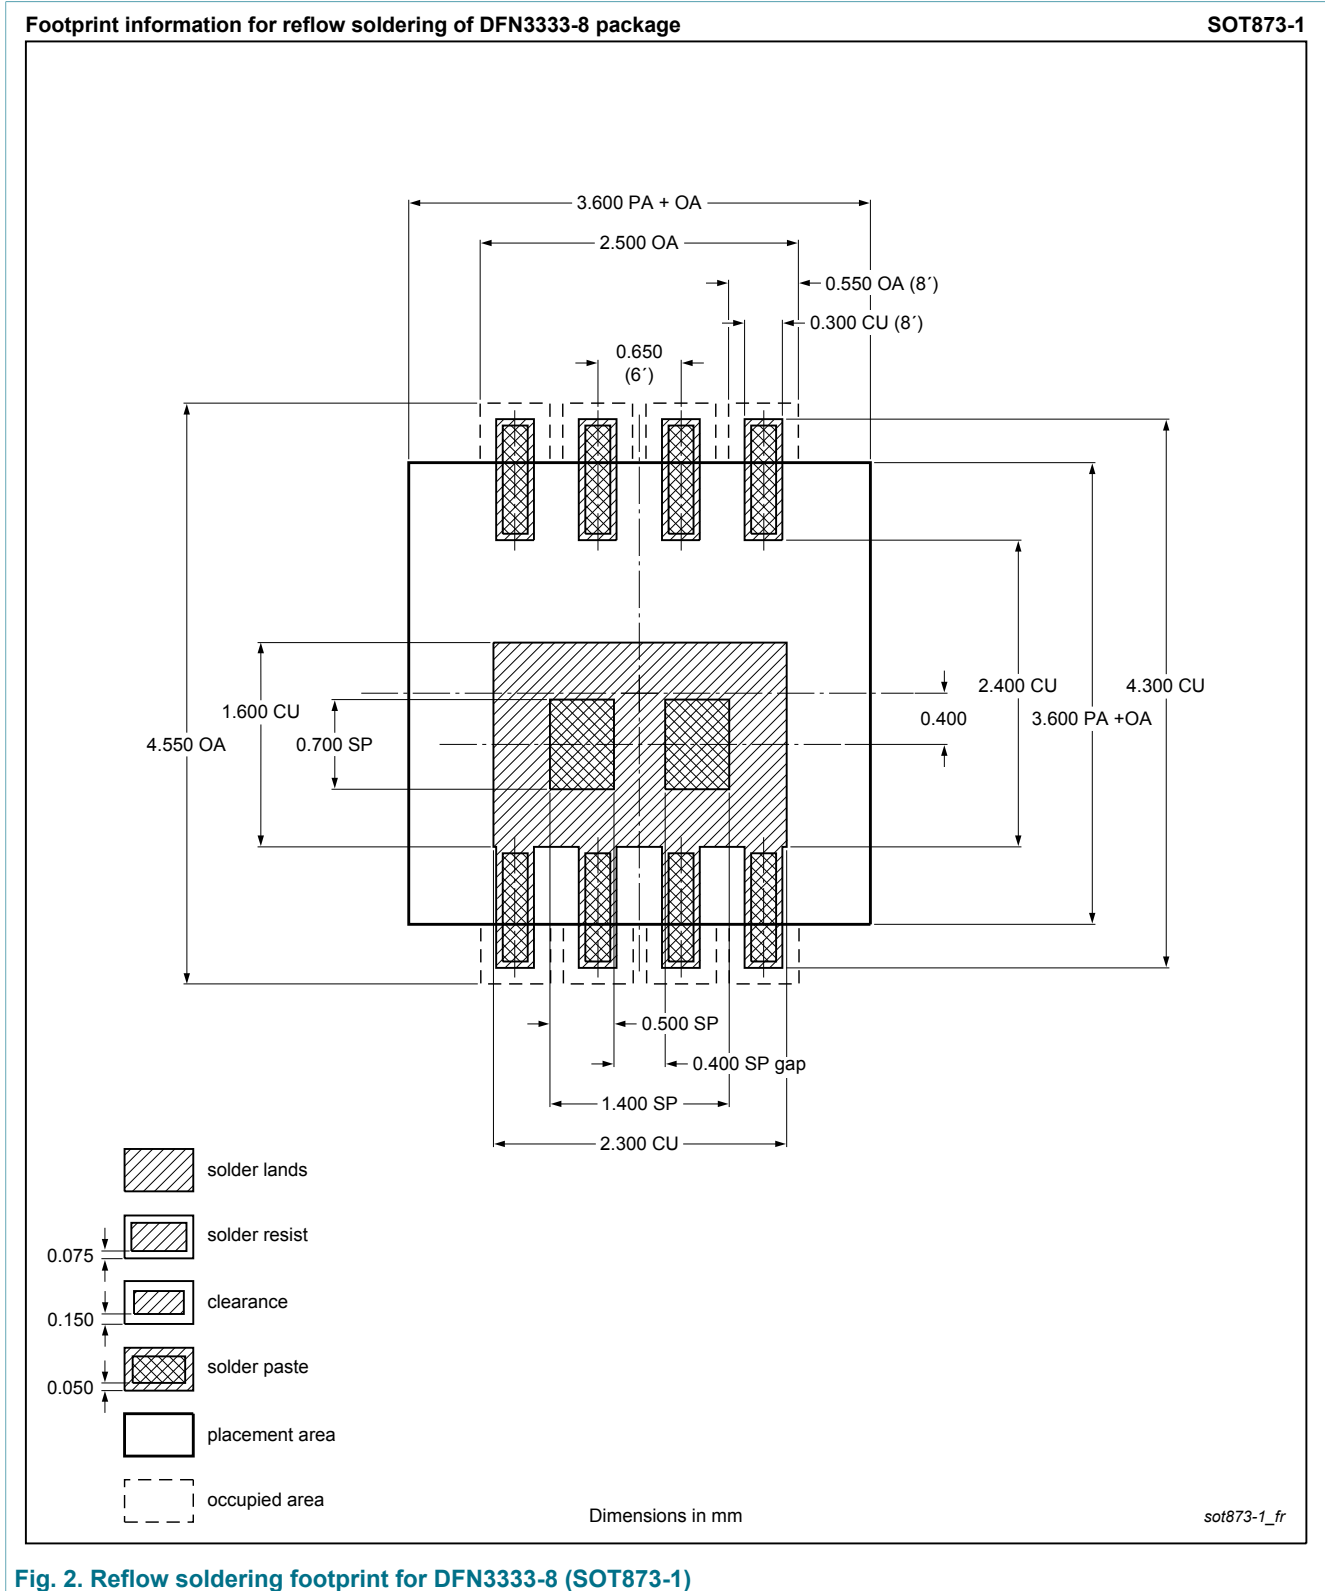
Reflow soldering footprint for DFN3333-8 (SOT873-1)
